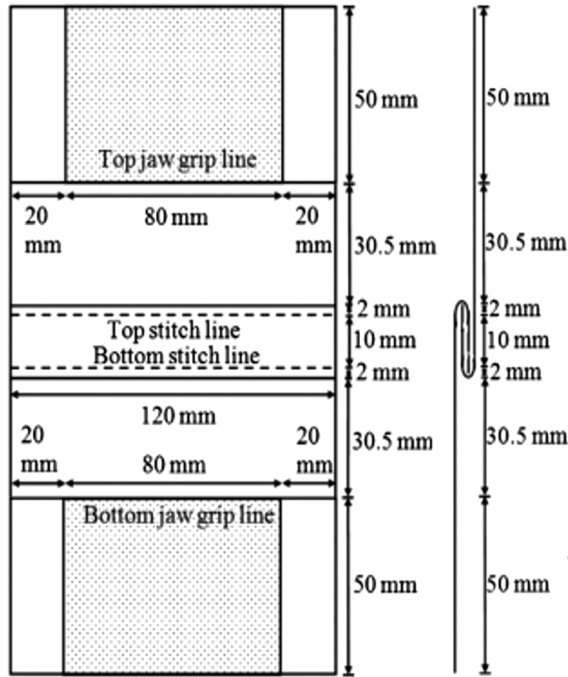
Grab test specimen dimension and its side view for measurement of tensile and impact loading⁶
